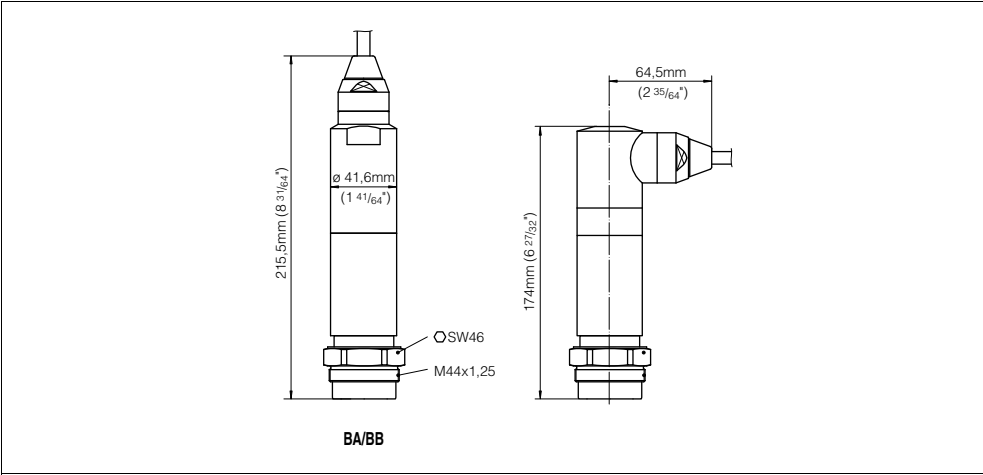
VEGABAR 74 - connection for paper industry: BA/BB = M44x1.25
